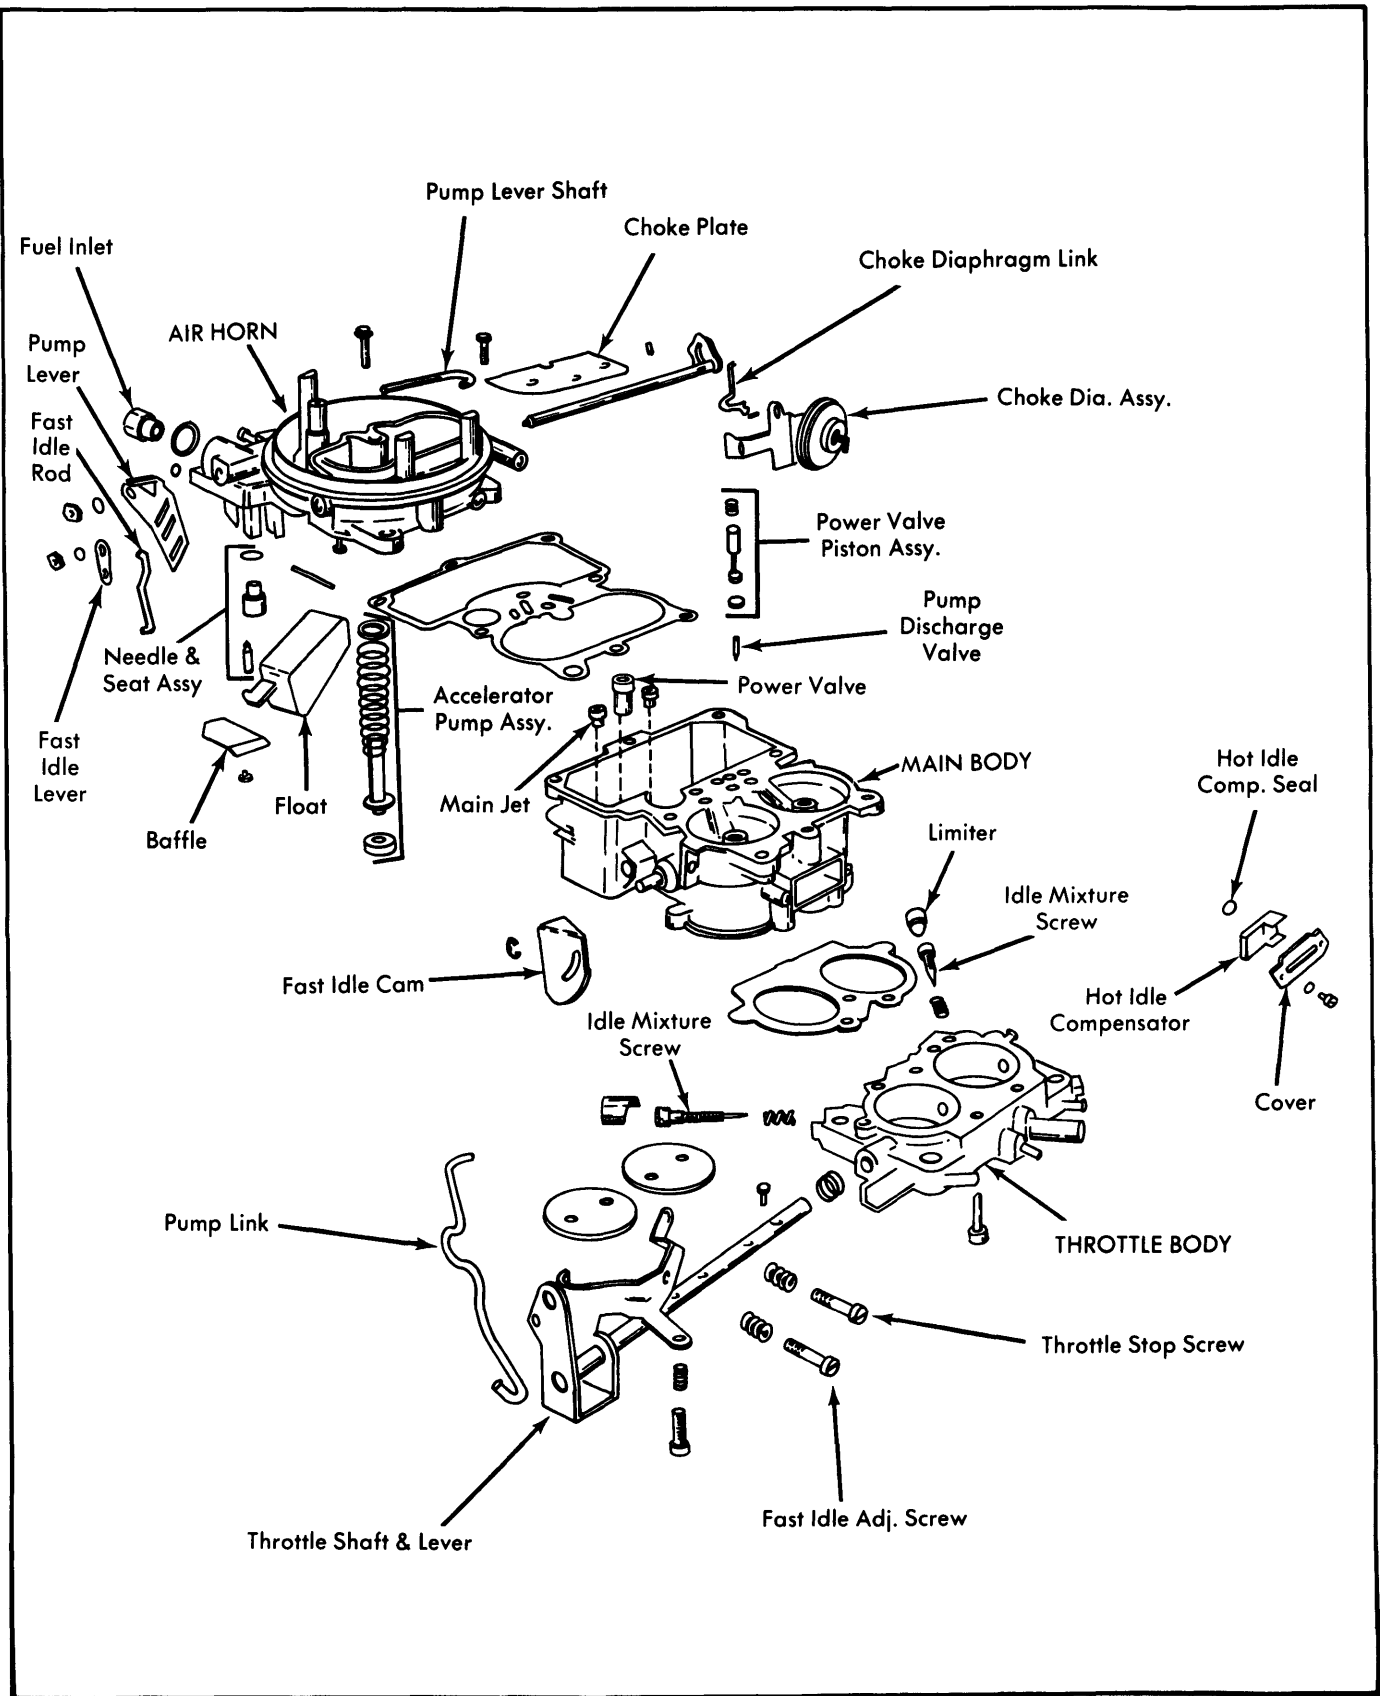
Exploded View of Holley Model 2245 2-Barrel Carburetor
